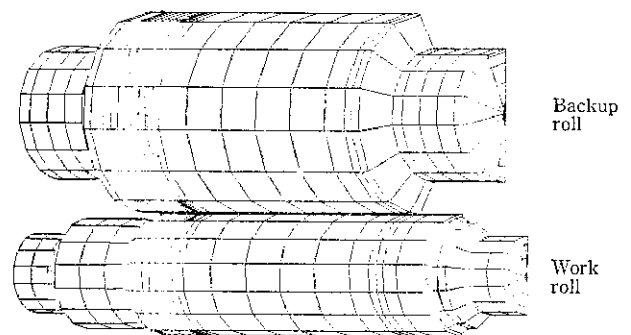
Finite element model of the roll of work roll shift mill for 3 dimensional contact analysis
